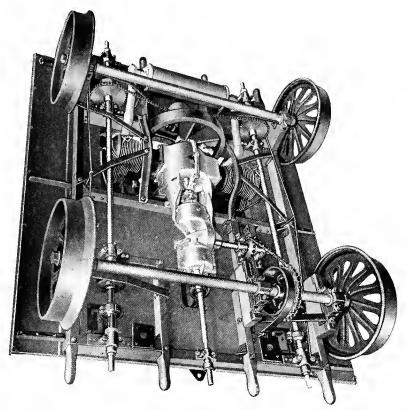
Bottom View of Au-tra-kar, Showing Side Shaft for Supplying Power for Outside Purposes.
